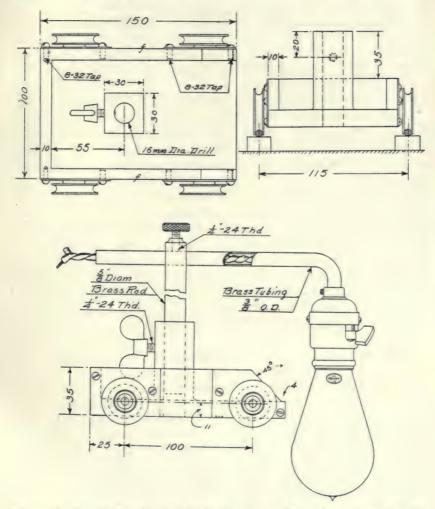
Construction drawings for lamp carriages. Dimensions, unless otherwise specified, are given in millimeters. Castings for the base of carriage may be obtained through the writers.
